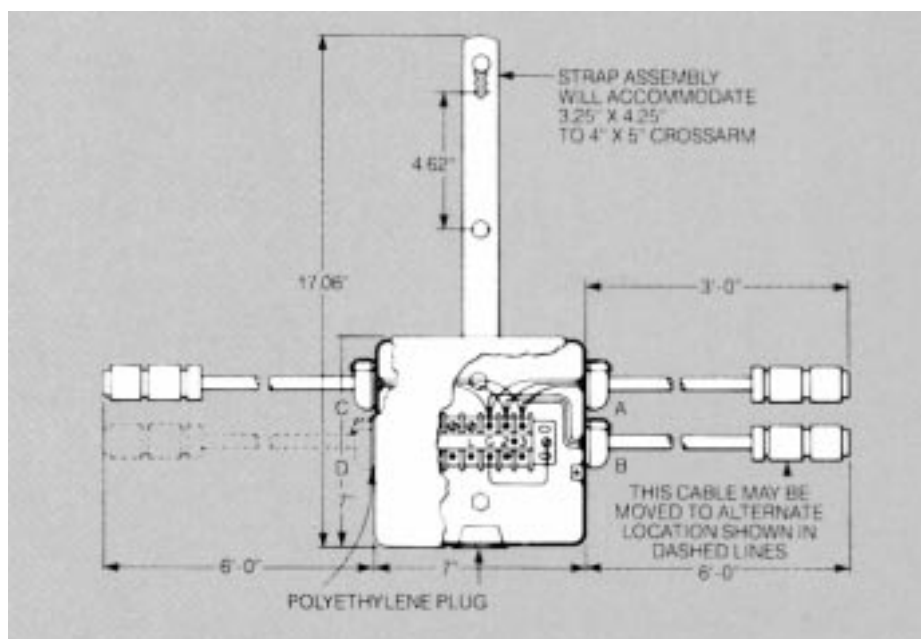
CM1J1 junction box dimensions (Standard cable lengths shown, three conductors per cable; box depth—2.75 in.)
